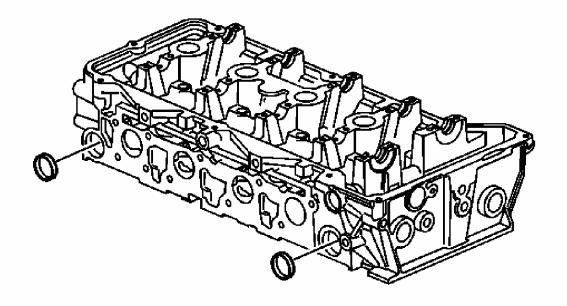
View of Expansion Coolant Plugs Courtesy of GENERAL MOTORS CORP.
